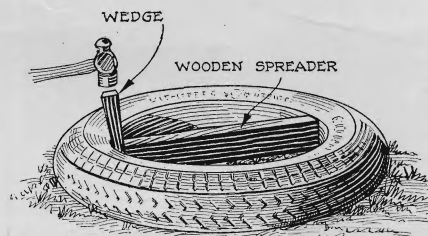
A piece of board and a wedge are handy to force a rim into locked position.
